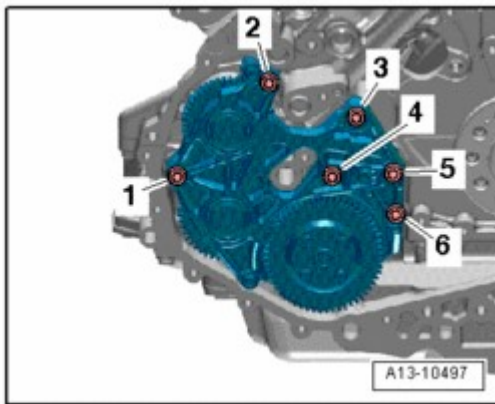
Positioning Spur Gear Unit And Tightening Bolts In Diagonal Sequence In Stages
